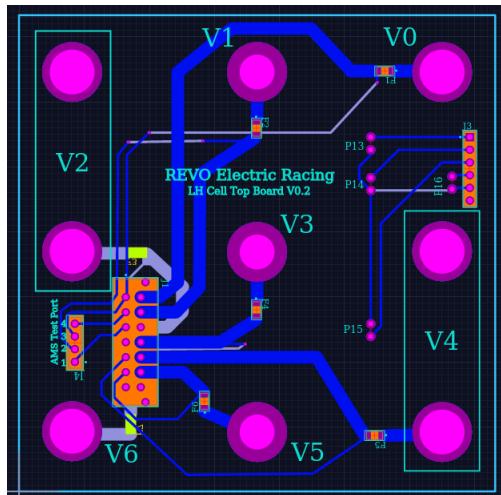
Cell Breakout Board PCB Layout for the left hand side Note the fuses labeled with "F" and then a number. There is only TS voltage on this PCB.
